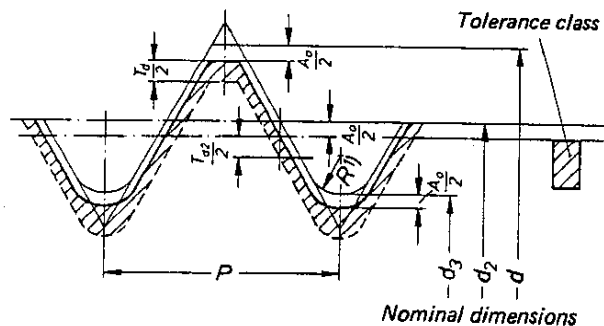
Bolt thread with negative fundamental deviation (e.g. tolerance position g)
